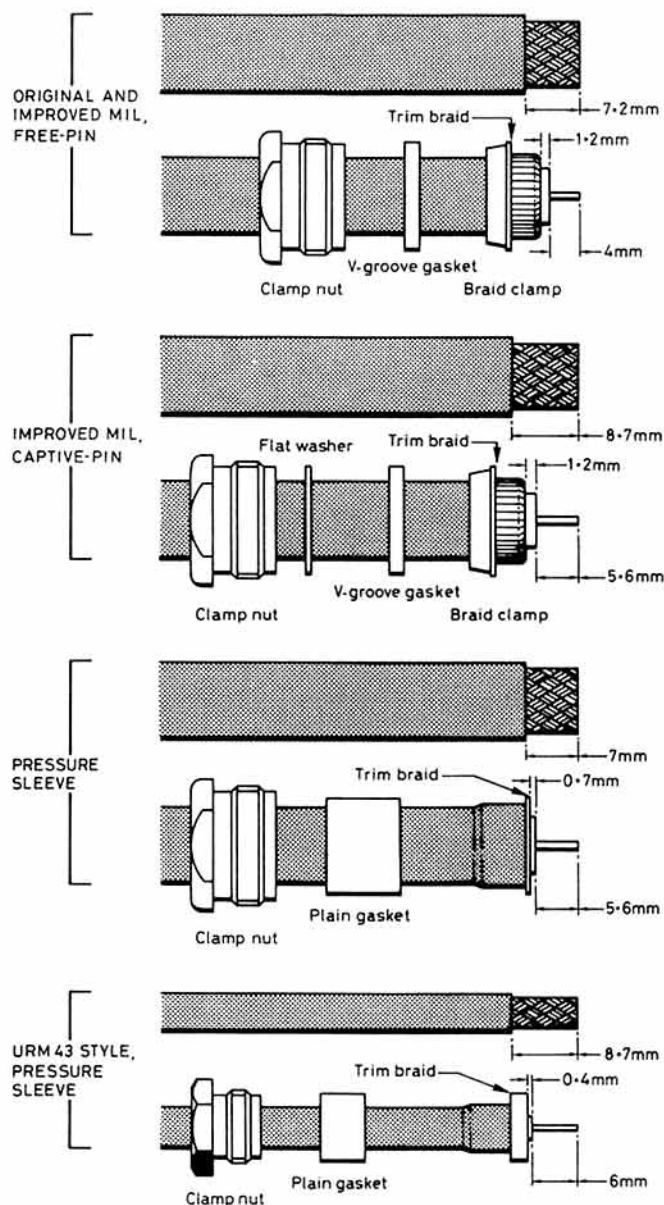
N-type dimensions, plugs, angle plugs and line sockets
